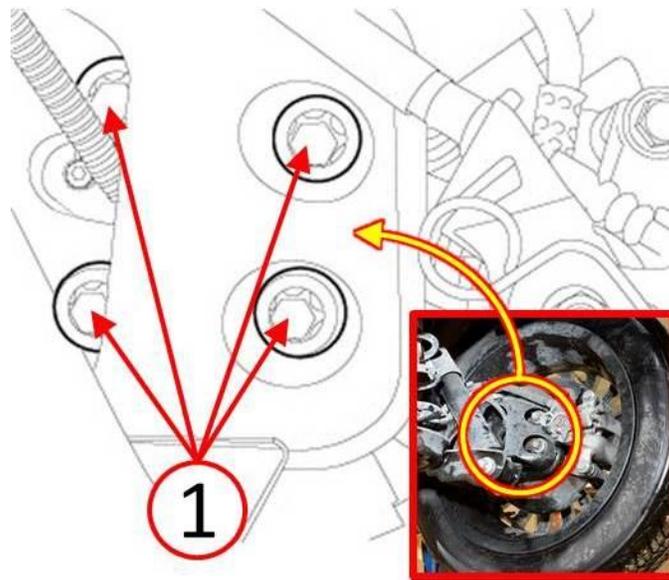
Loosen Spindle Bolts - Right Side Shown
